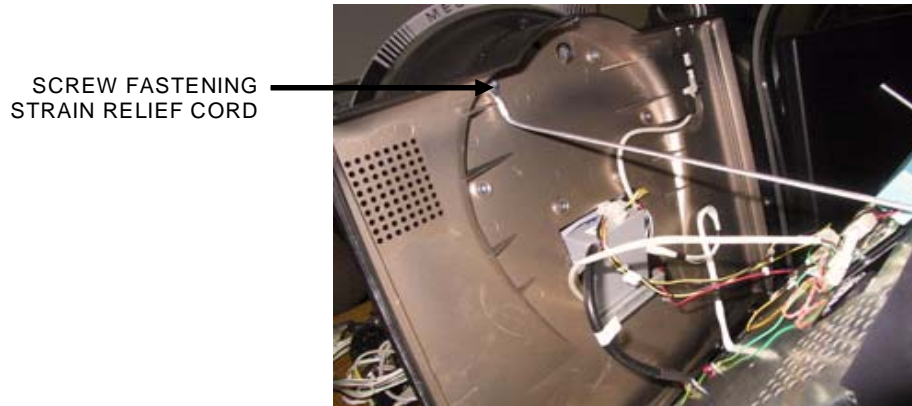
HALFWAY-OPEN MONITOR ASSEMBLY
